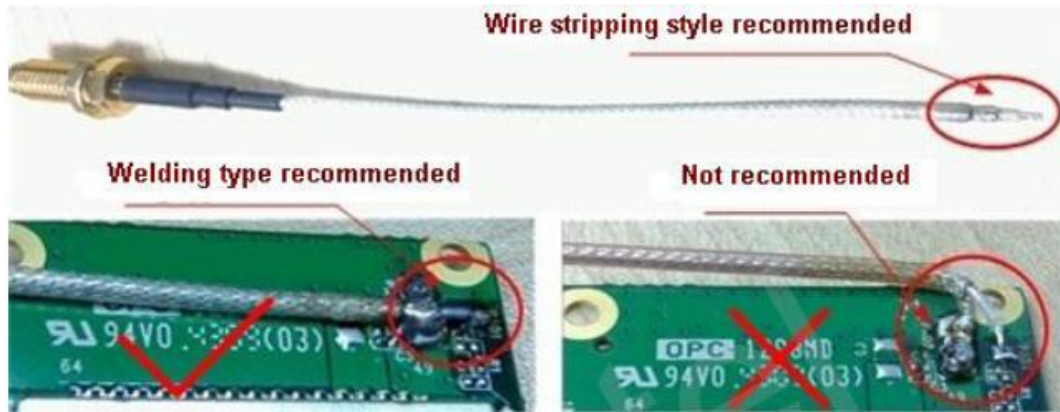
Schematic diagram of the antenna connector using welding
